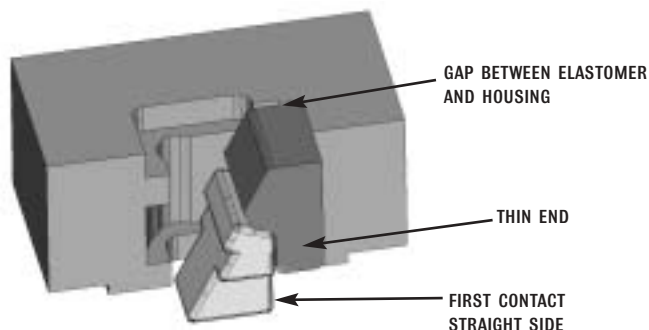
THE ELASTOMER IS BETWEEN THE CONTACT AND HOUSING, FLUSH WITH THE HOUSING.
